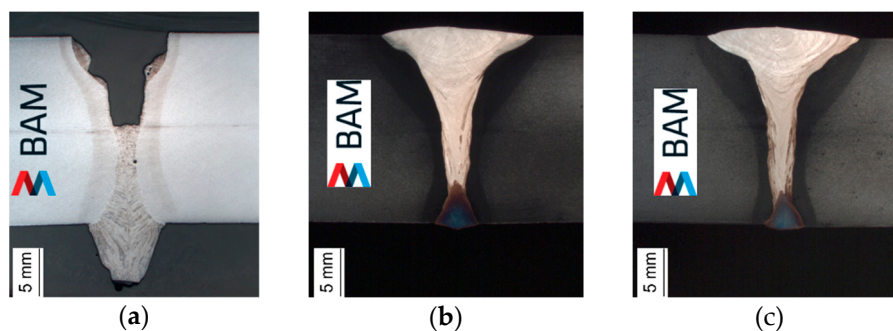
Cross sections of HLAW on 20-mm-thick plates of S355J2 using 12.2 kW laser power and wire feeding rate 11 m min⁻¹, at a welding speed of 0.5 m min⁻¹: (a) without electromagnetic weld pool support; (b) with electromagnetic support only (magnetic field perpendicular to the welding direction); (c) with electromagnetic support and stirring (magnetic field turned through 30°).
